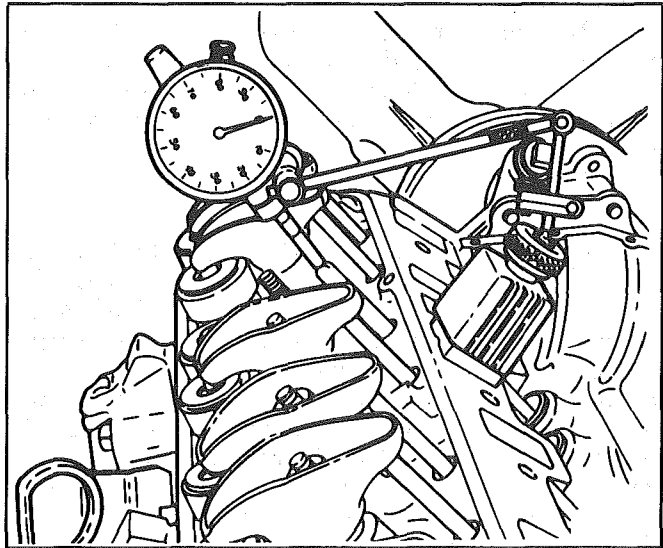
A3-29 Measuring Camshaft Lobe Lift
